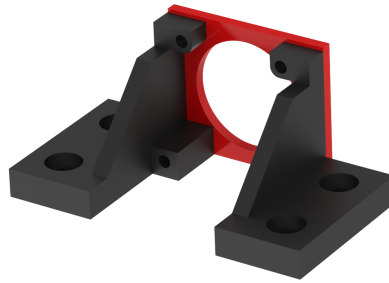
The assembly to hold the motor in place on the middle plate.
